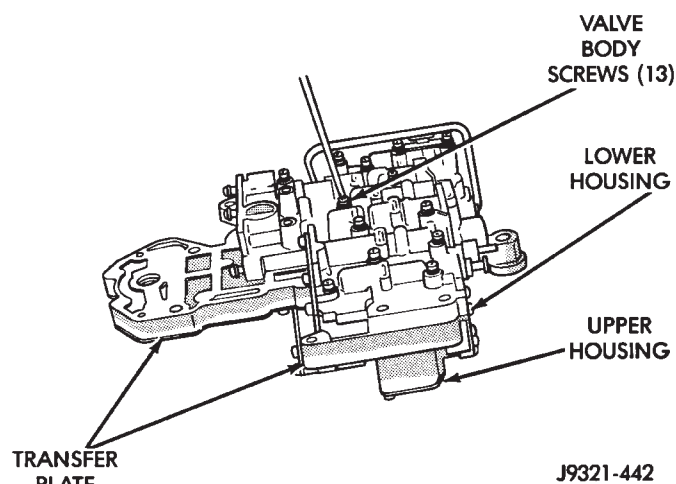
Installing Lower Housing On Transfer Plate And Upper Housing
